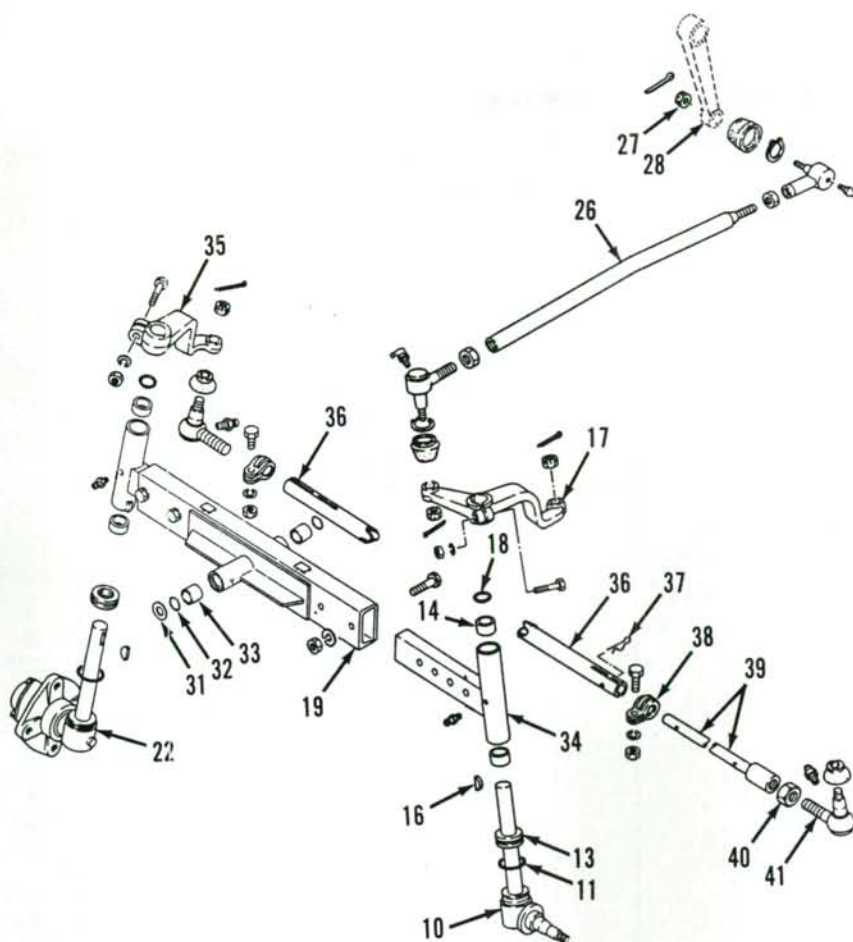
Exploded view of adjustable axle used on some 245 and 255 models.
